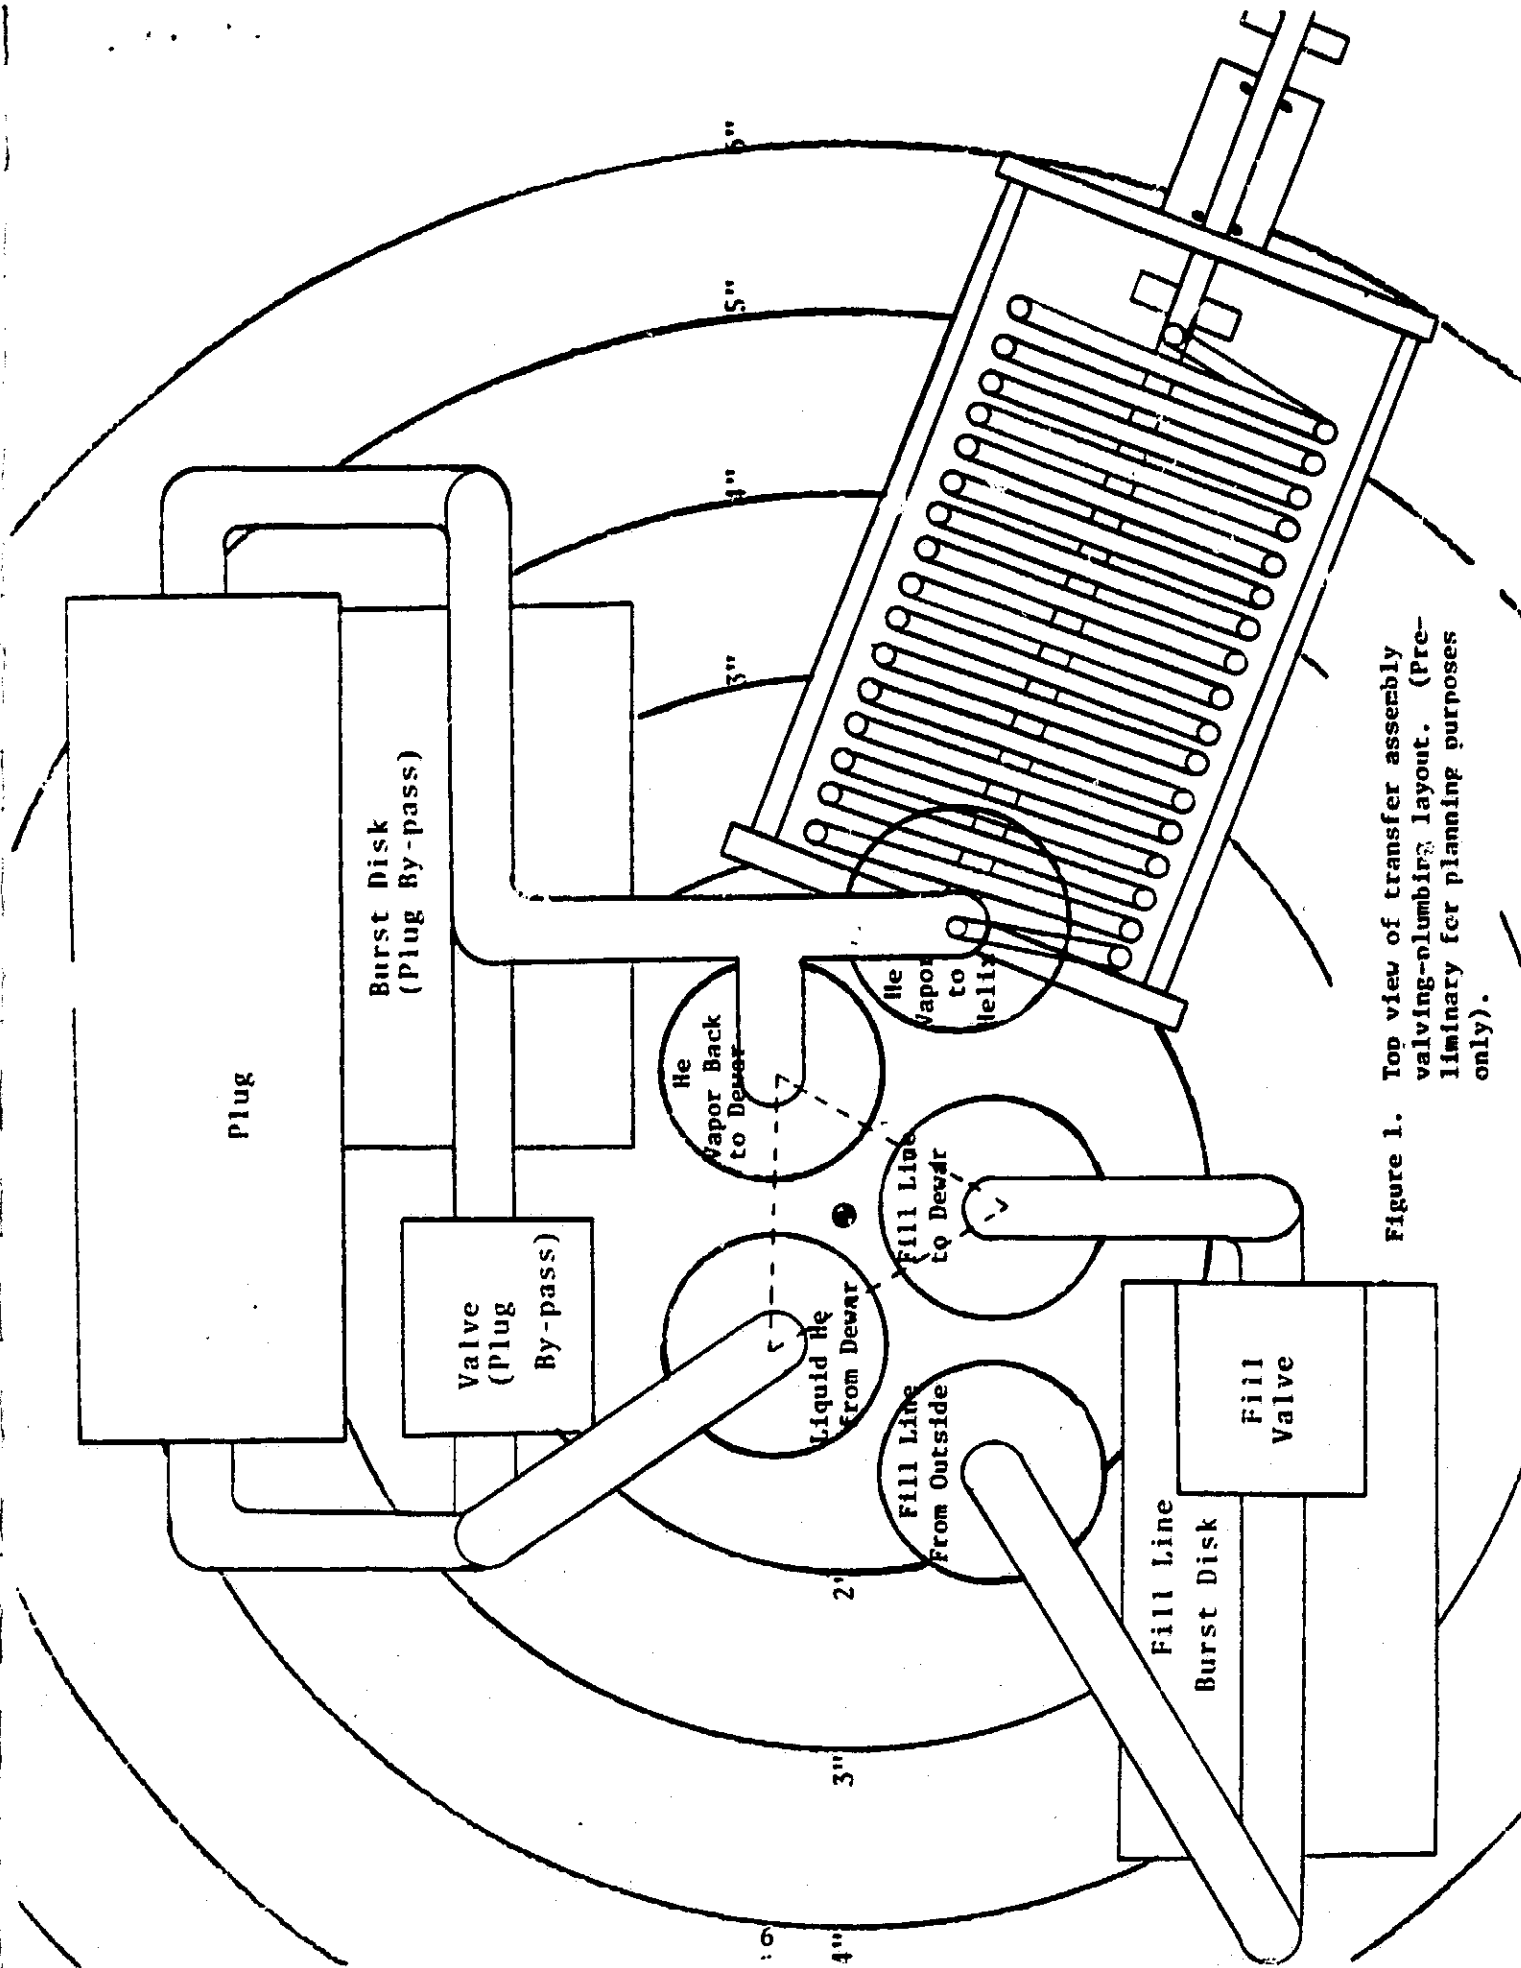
Top view of transfer assembly valving-plumbing layout. (Preliminary for planning purposes only).
